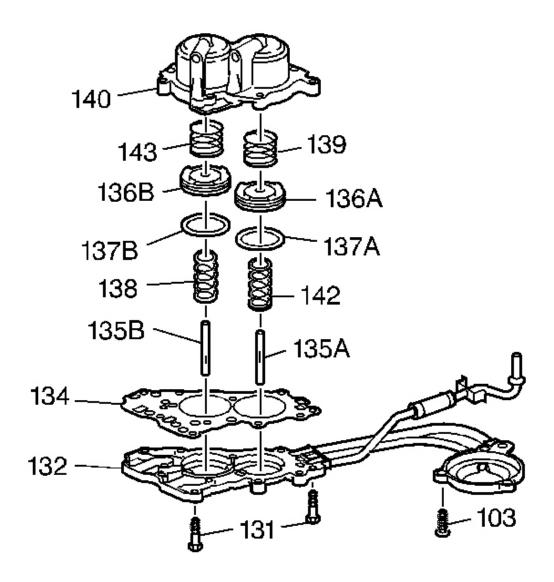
Expanded View Of Accumulator Components Courtesy of GENERAL MOTORS CORP.
